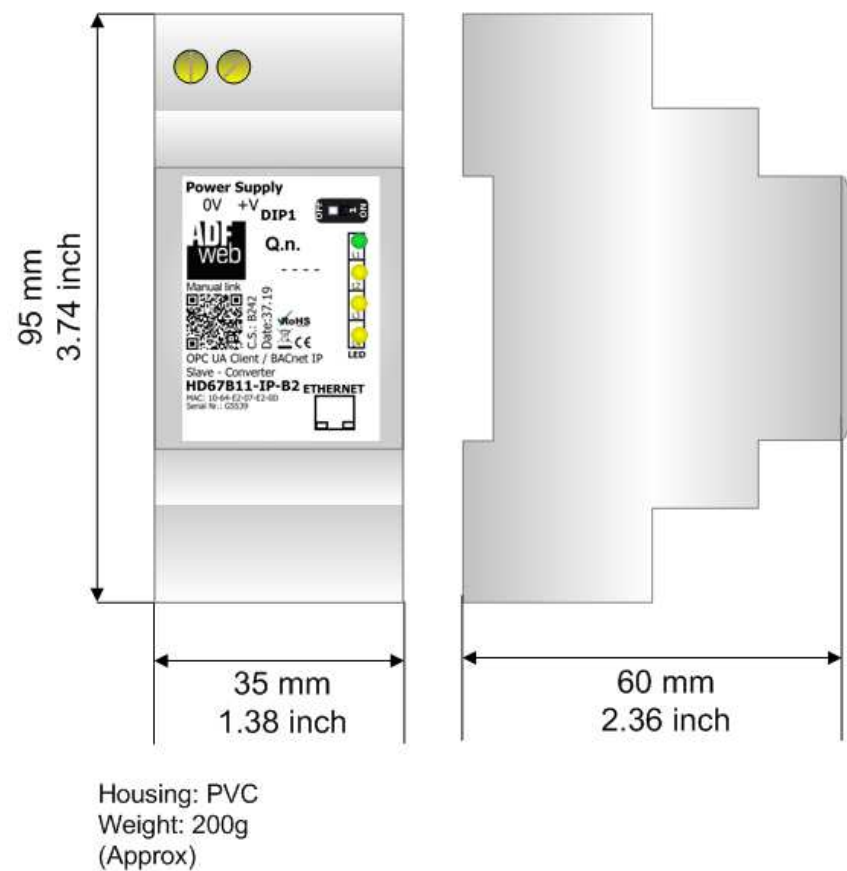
Mechanical dimensions scheme for HD67B11-xxx-B2
